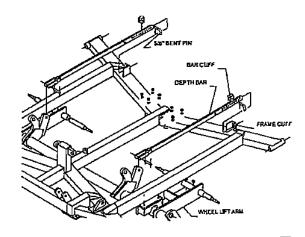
DEPTH CONTROL ASSEMBLY
